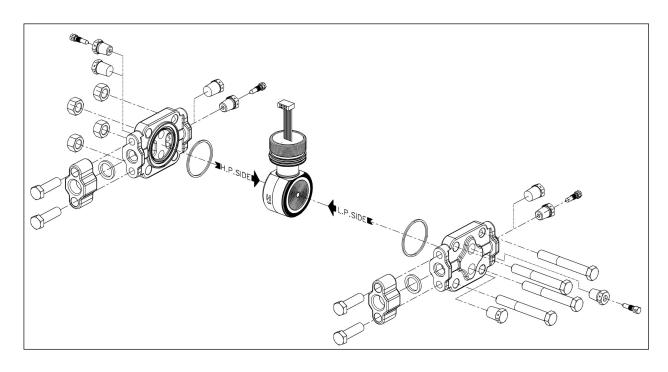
STG730, 740, 770, and STA722, 740 Transmitter Body (Ref.)
